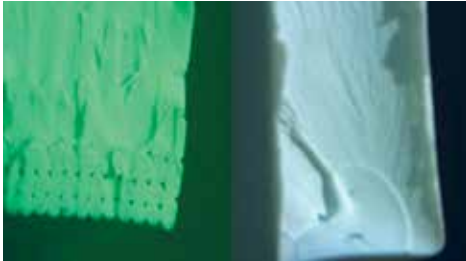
Injection moulded part is non-porous and isotropic compared to the printed part (E. Hakala 2014).
